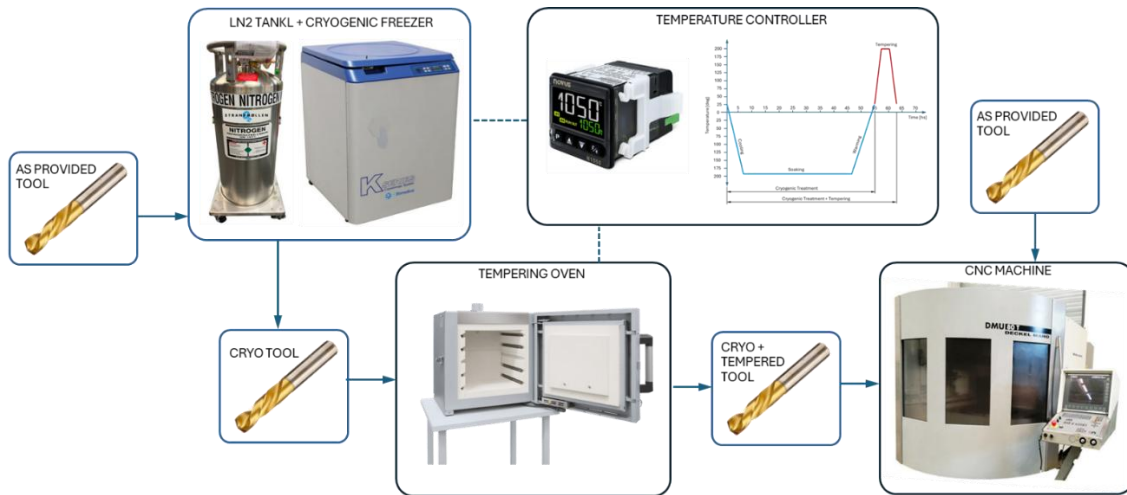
Tool flow diagram - from cryogenic treatment to the CNC machine
